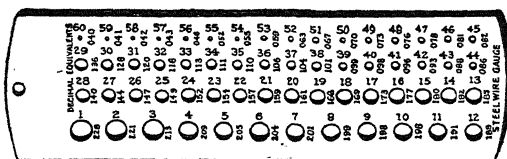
Drill gauge. The holes are used to gauge the sizes of drills which are too small to permit of having the size marked on them. The number and corresponding size of the drill are shown beside the hole. The "Jobbers Drill Gauge," which is similar to the gauge illustrated, shows the sizes from  $\frac{1}{16}$  to  $\frac{1}{2}$  in. varying by 64ths.
